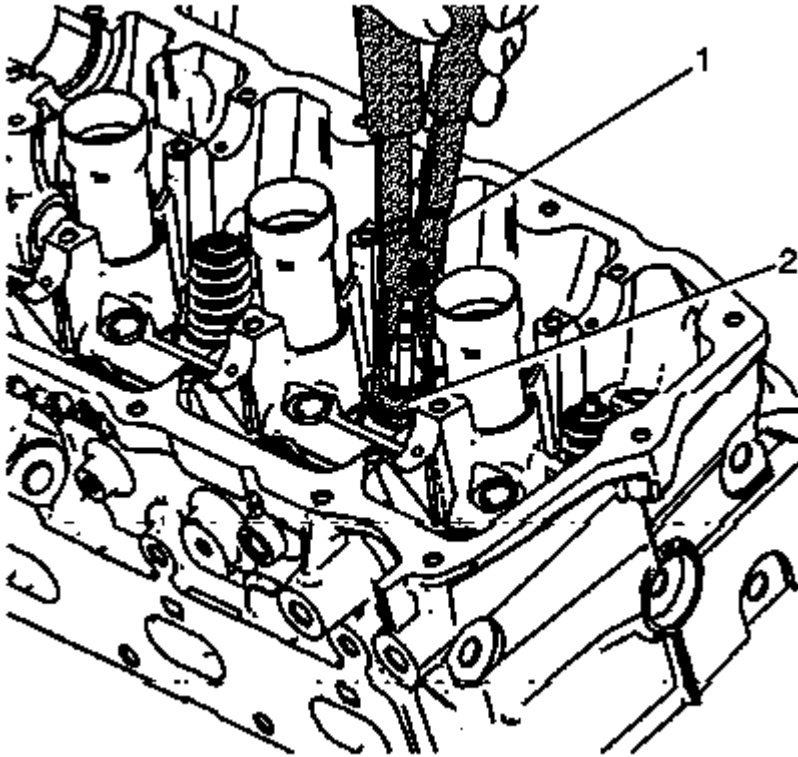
View Of EN 46110 Valve Spring Compressor Nut
